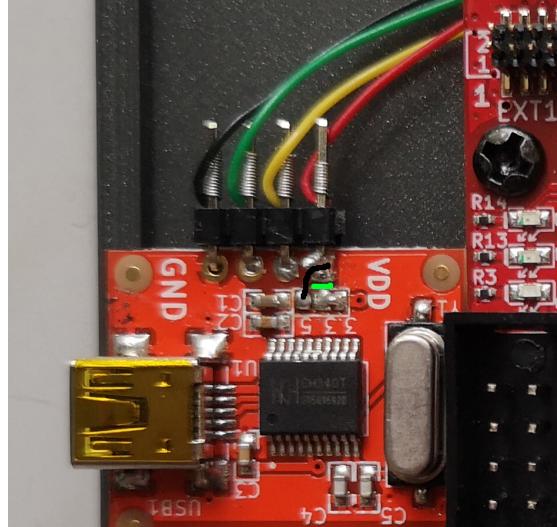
Cut the pcb track (GREEN) and solder a bridge from 5V pad to the right most connector pin.
